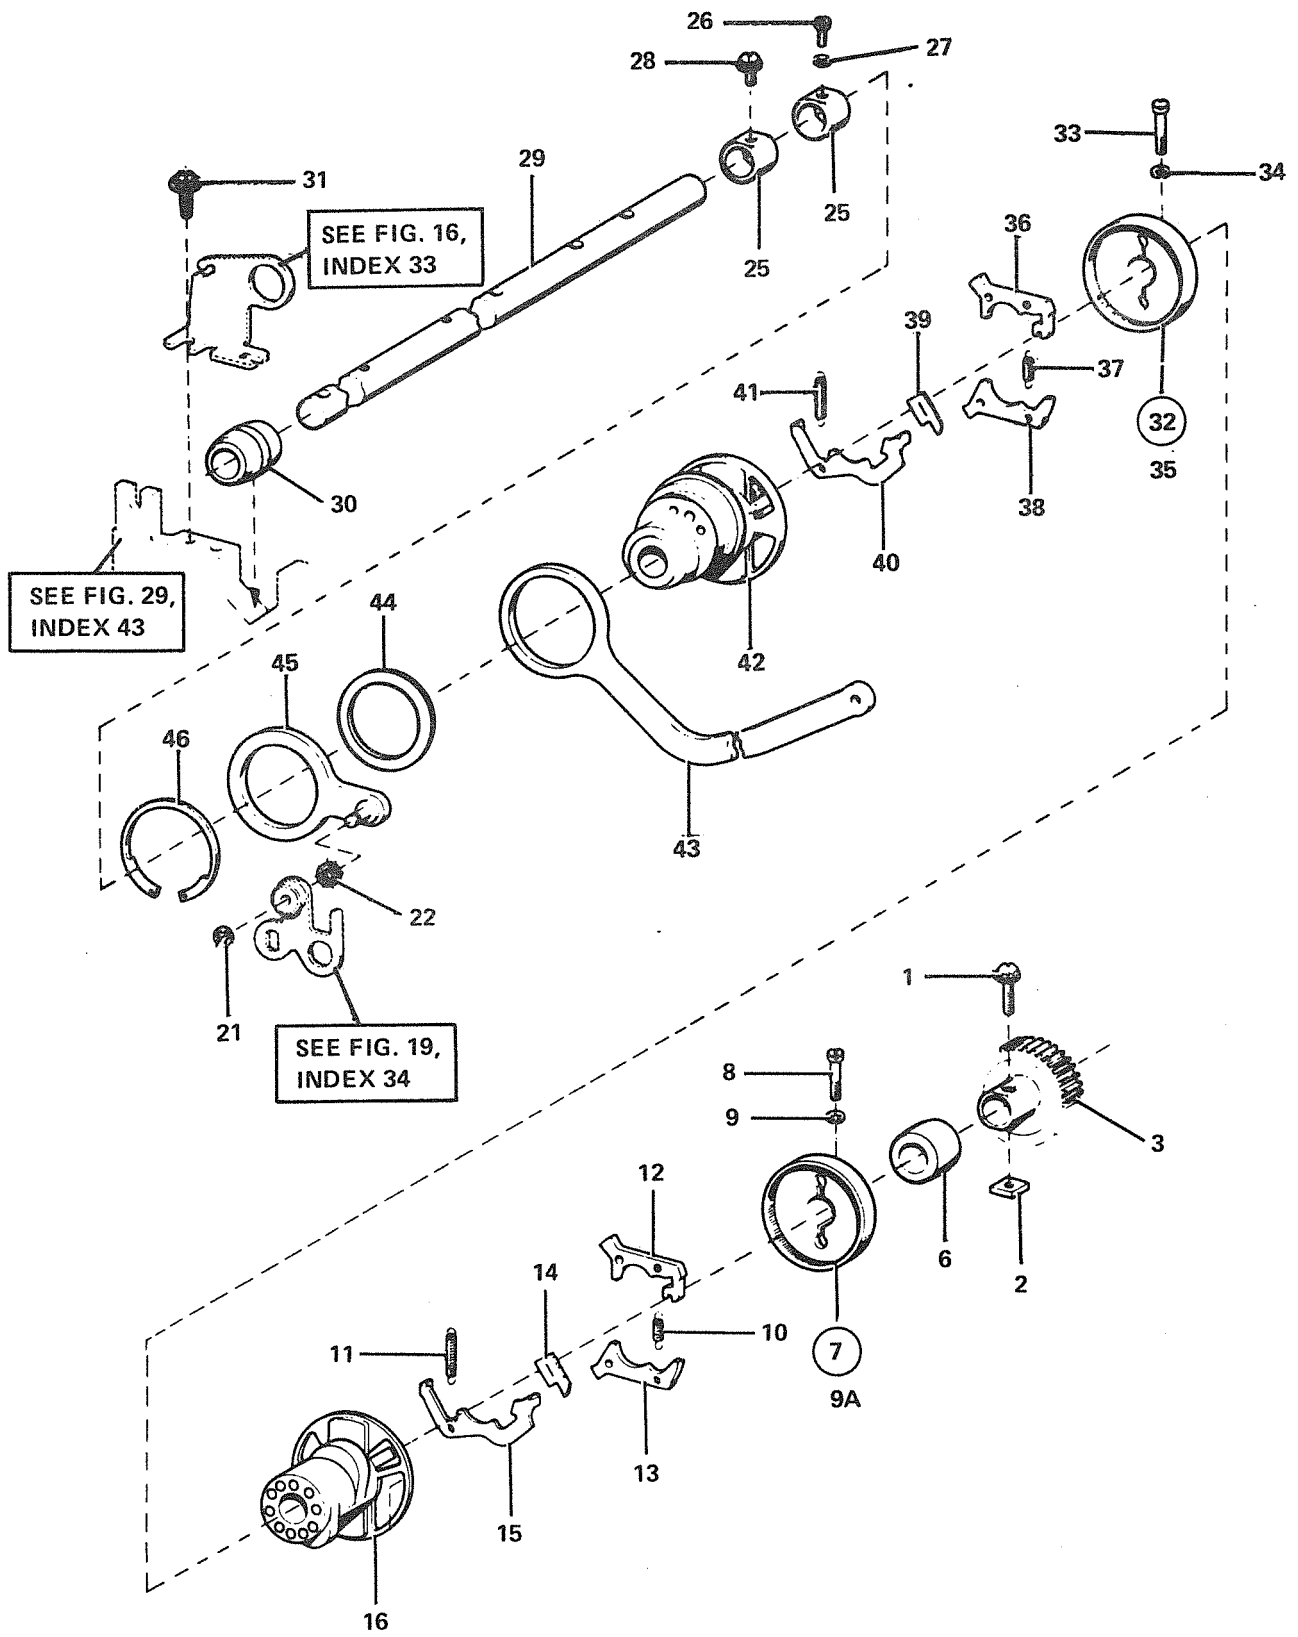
PRINTER- MAIN SHAFT MECHANISM. SEE LIST 15.
